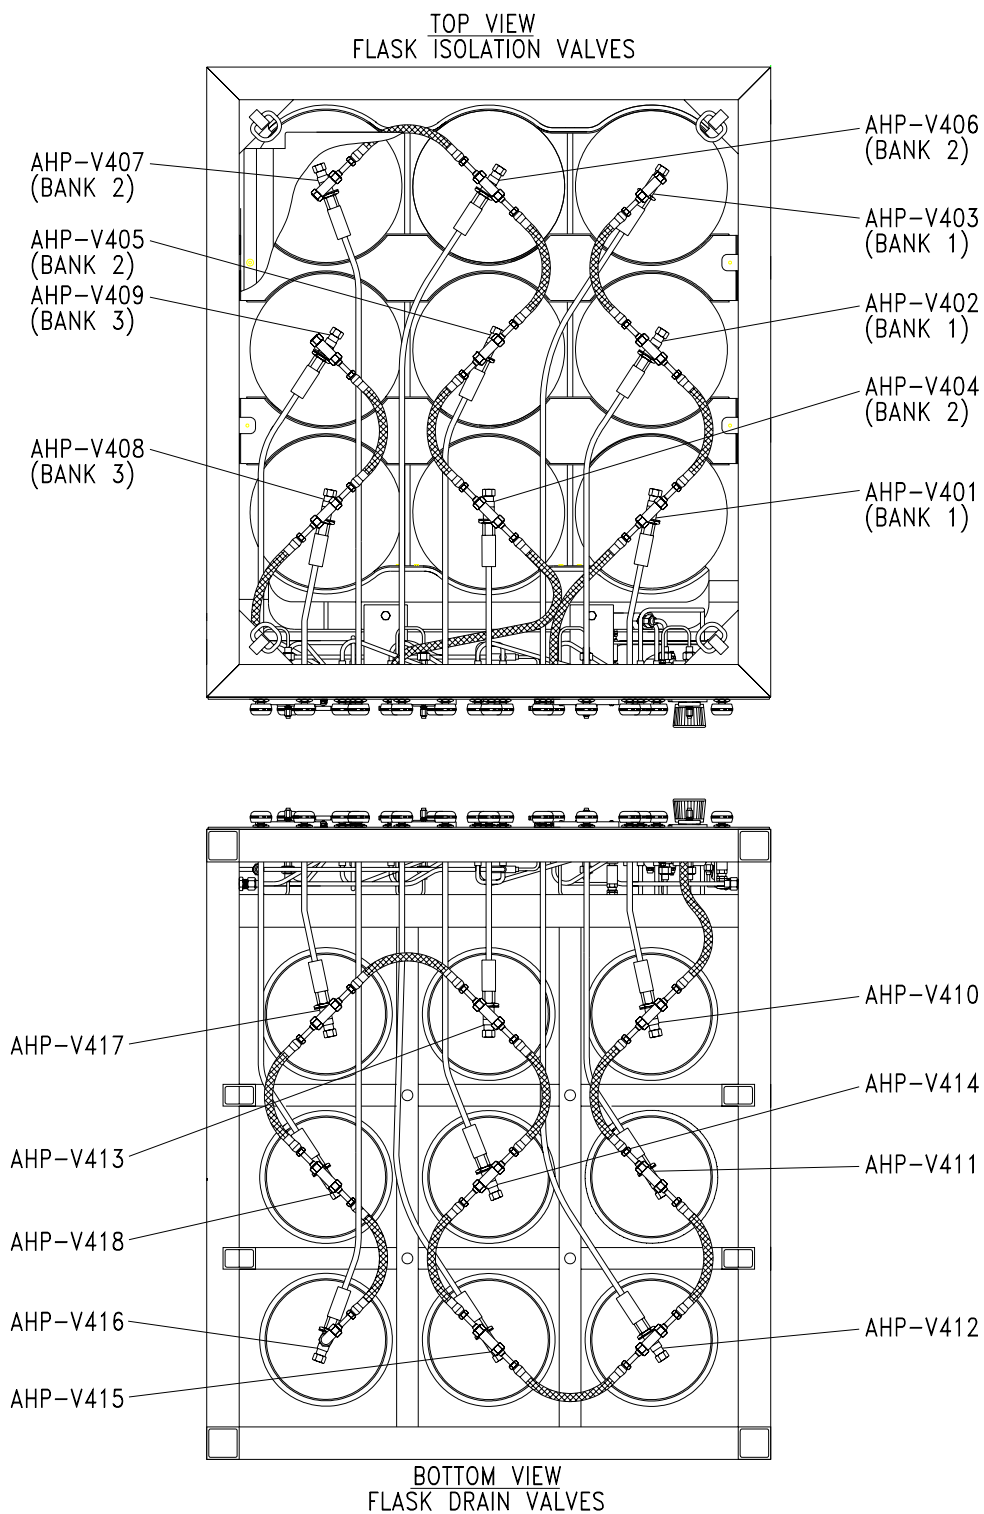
AFRA Flask Connections, Top and Bottom Views
